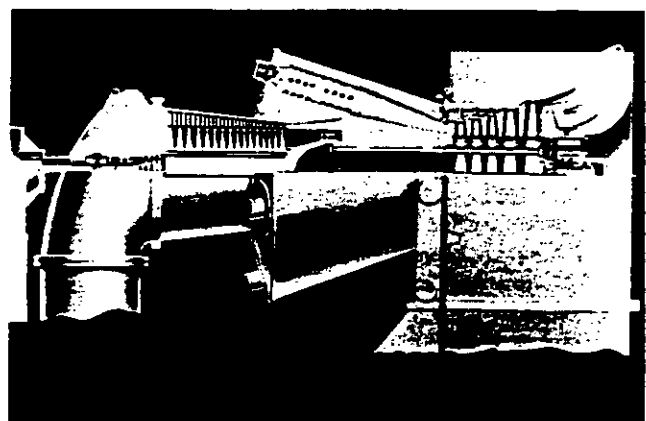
CROSS SECTION OF W81 COMBUSTION TURBINE
